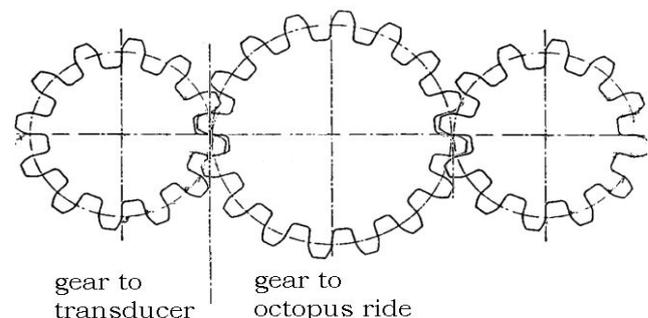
Illustration of Gear Connection from the Main Pole to the Gear Connected to the Transducer.
